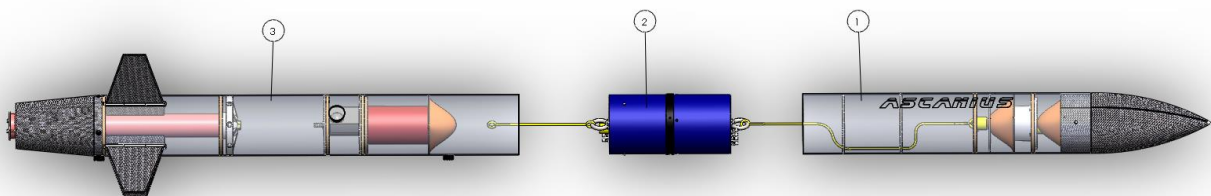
Exploded view of rocket assembly into primary subassemblies; 1 is the fore tube section, 2 is the electronics bay, and 3 is the aft tube section.
